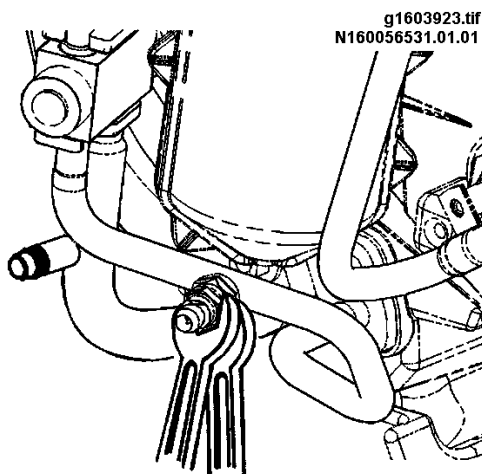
Use a Back-Up Wrench When Loosening or Tightening Fittings
